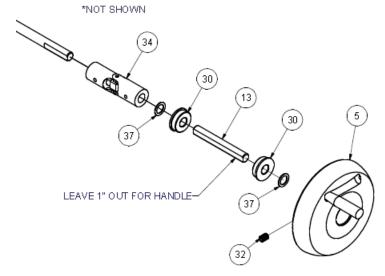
B Feed Screw Sub-Assembly Diagram (2680S801) Part 2
